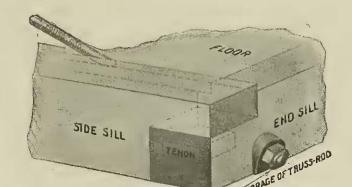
LAP JOINT, MORTISED AND TENONED, OF END AND SIDE SILLS
